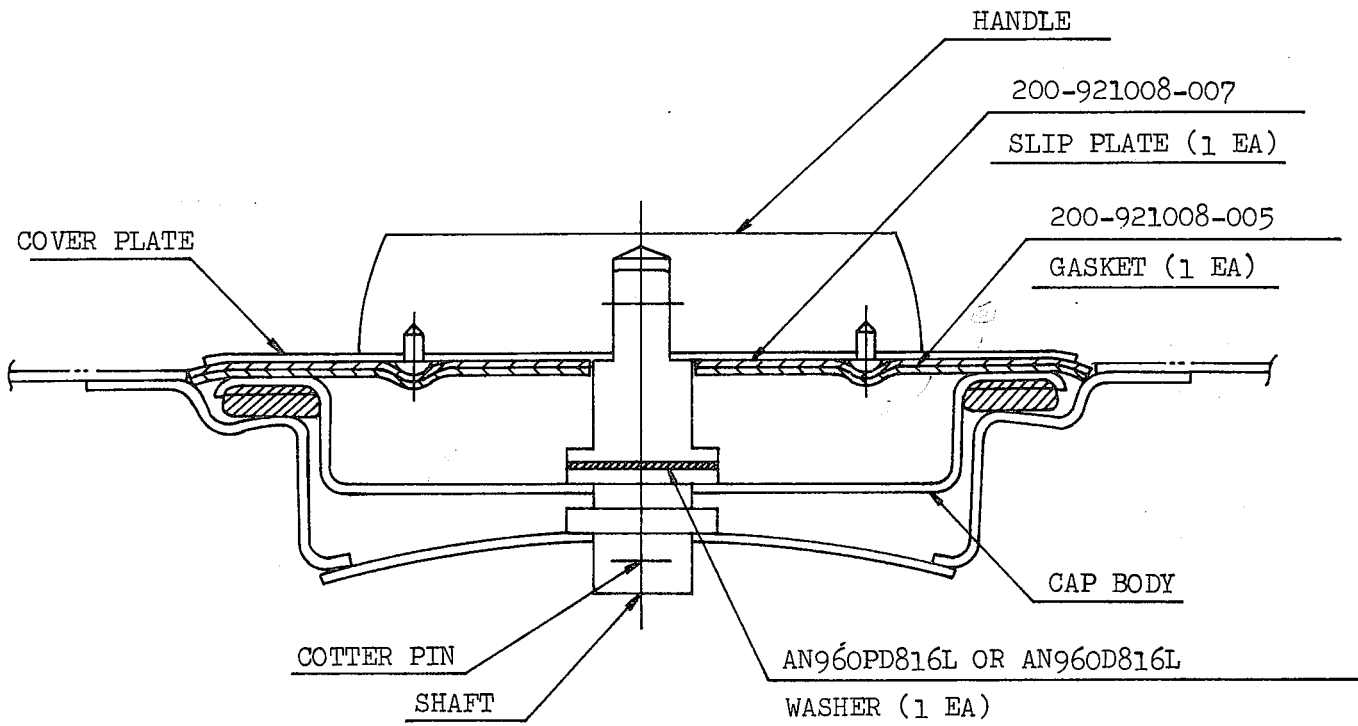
MODIFICATION OF FUEL TANK FILLER CAP
